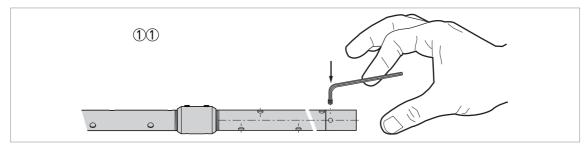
How to assemble the segmented coaxial probe: part 3
